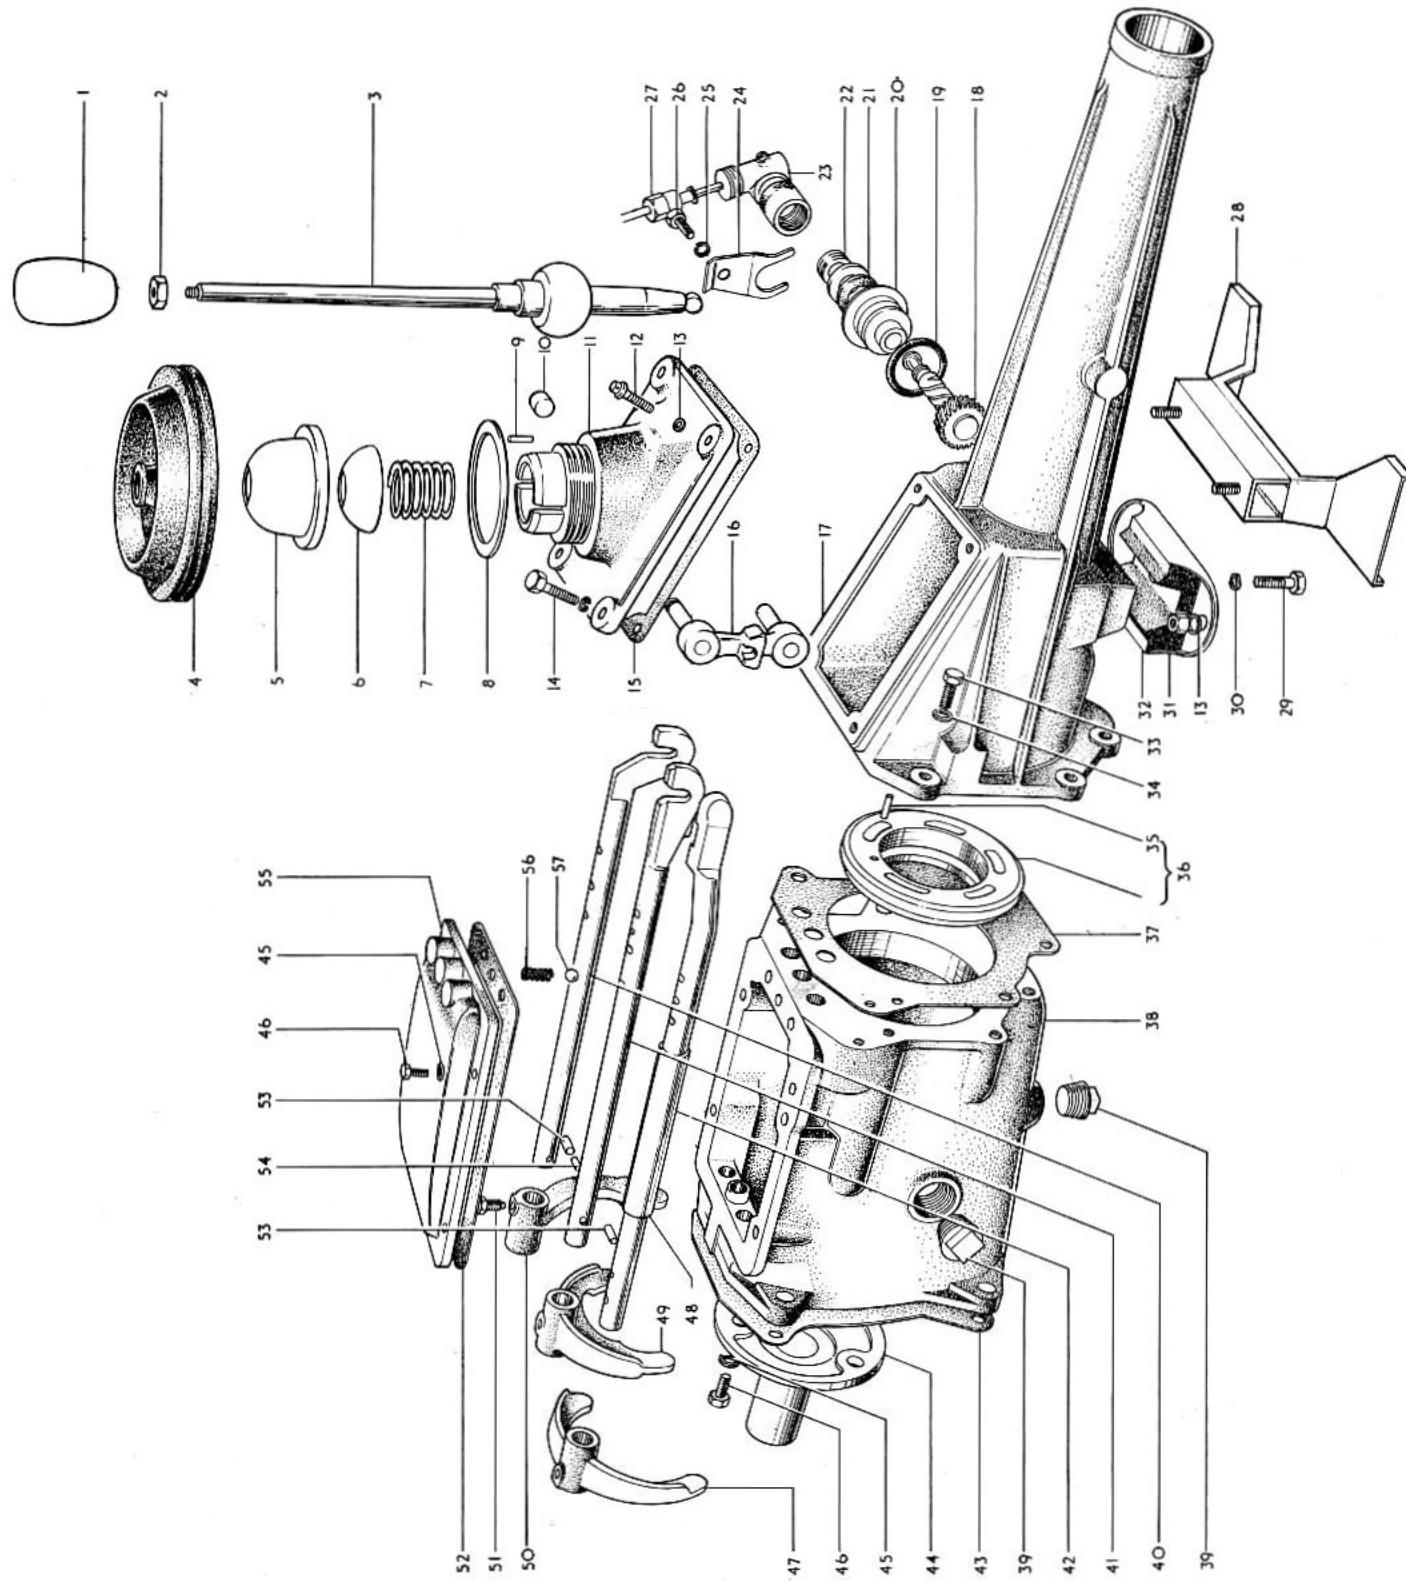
GEARBOX EXTERNAL AND REMOTE CONTROL COMPONENTS
